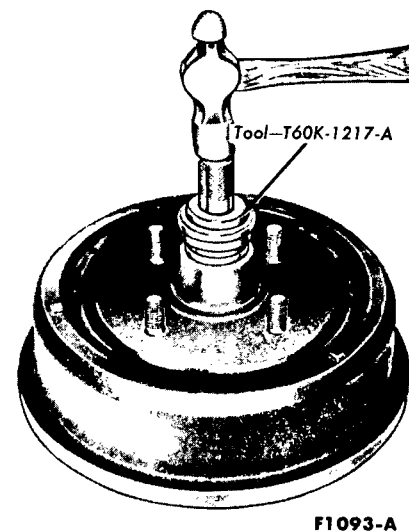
Installing Front Wheel Bearing Cup—Falcon 6-Cylinder
